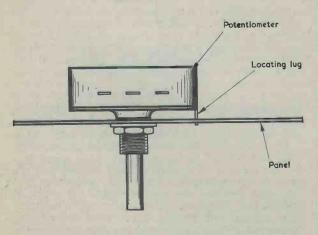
When fitting a potentiometer or rotary switch the locating lug should pass through a hole in the panel
